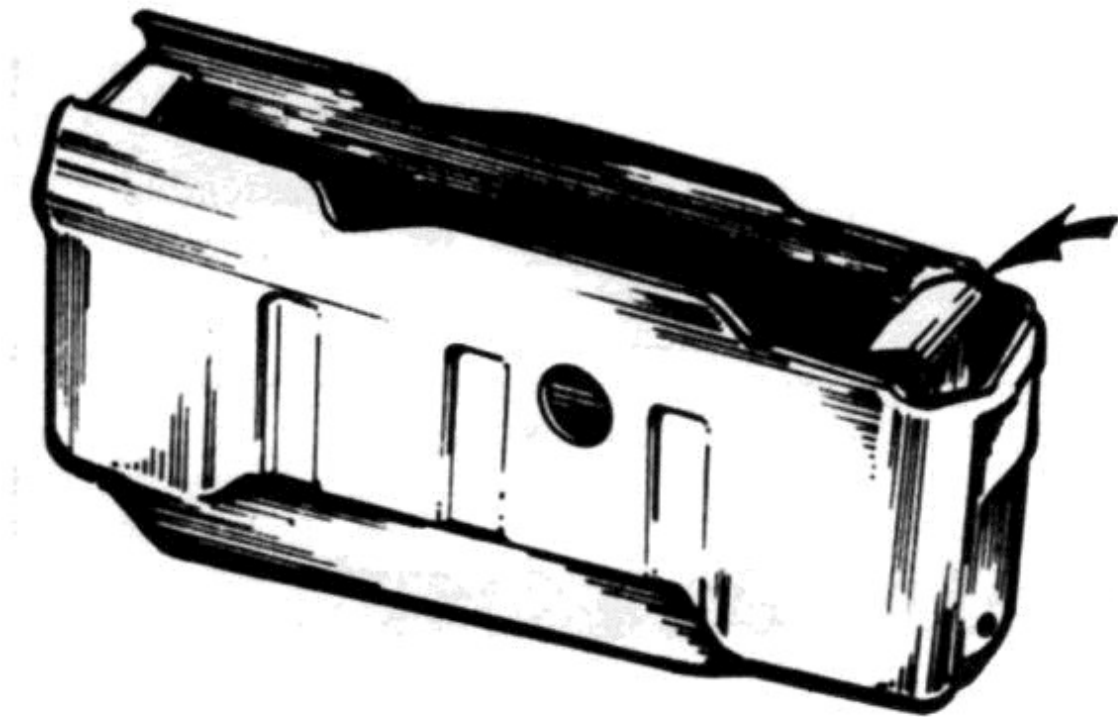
The magazine filler piece must be properly assembled to allow free passage of the follower and spring.
